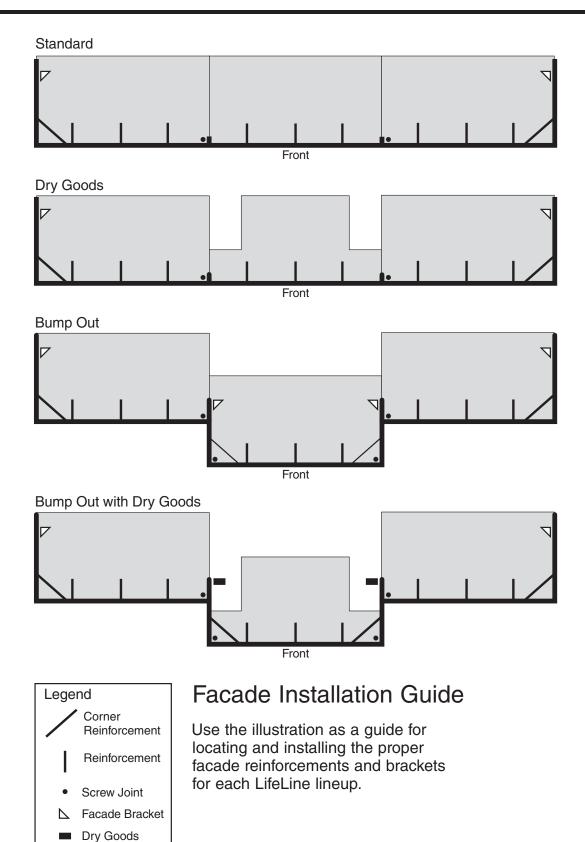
Install Front Facade to Side Facade (Bump Out and Bump Out with Dry Goods)
